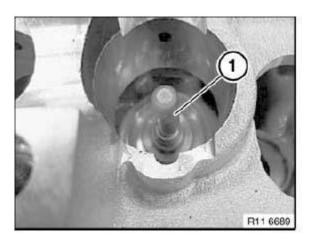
Identifying Mounting Sleeve Courtesy of BMW OF NORTH AMERICA, INC.
